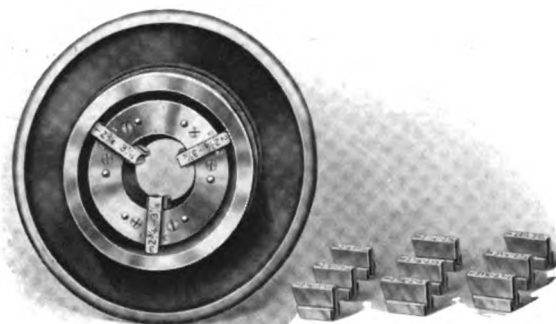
Quick Catch Chuck with Three Sets of Jaws. Ten Sets Can Be Furnished—Complete Range, 9/16" to 3 11/16"
